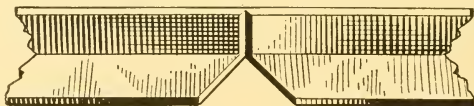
CUT, PREPARATORY TO BENDING ANGLE BRASS
